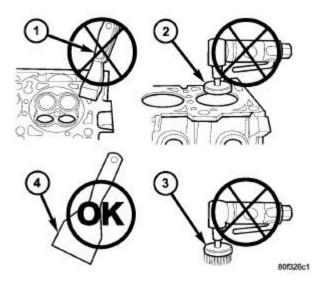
PROPER TOOL USAGE FOR SURFACE PREPARATION Courtesy of CHRYSLER LLC
